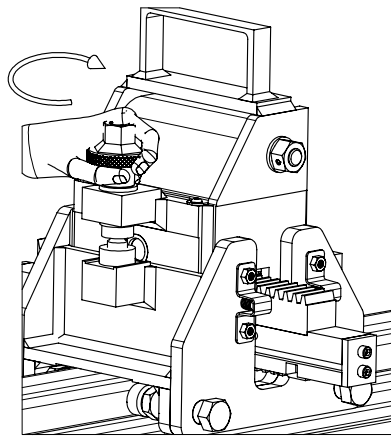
Turn the height adjustment knob clockwise to lower the gearbox
